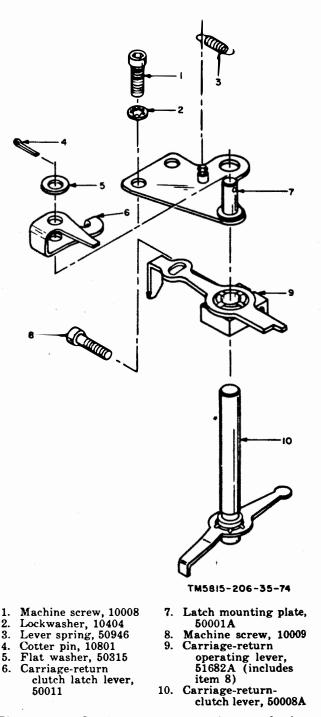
Carriage-return operating mechanism (TT-4A/TG), exploded view.
